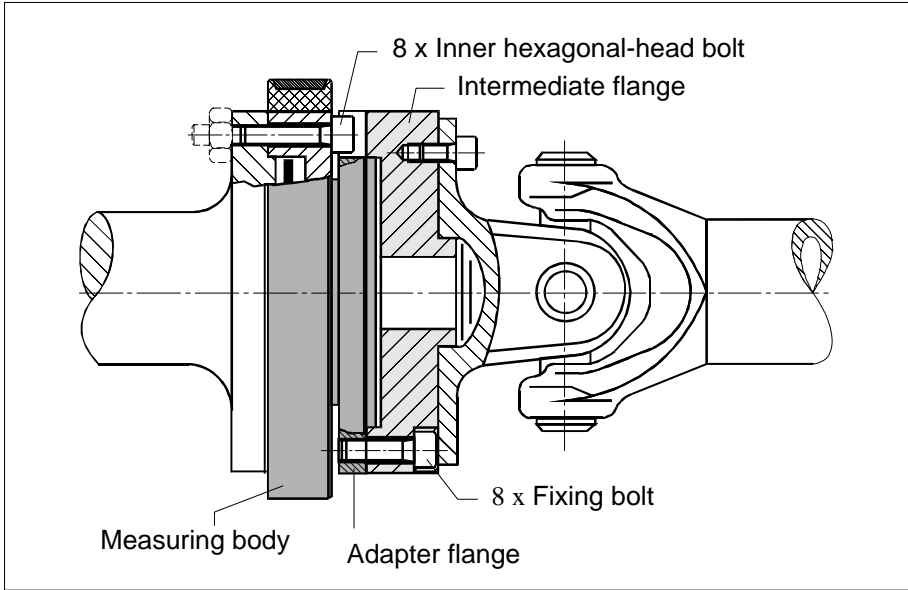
Screwed rotor joint for a T10F torque flange
